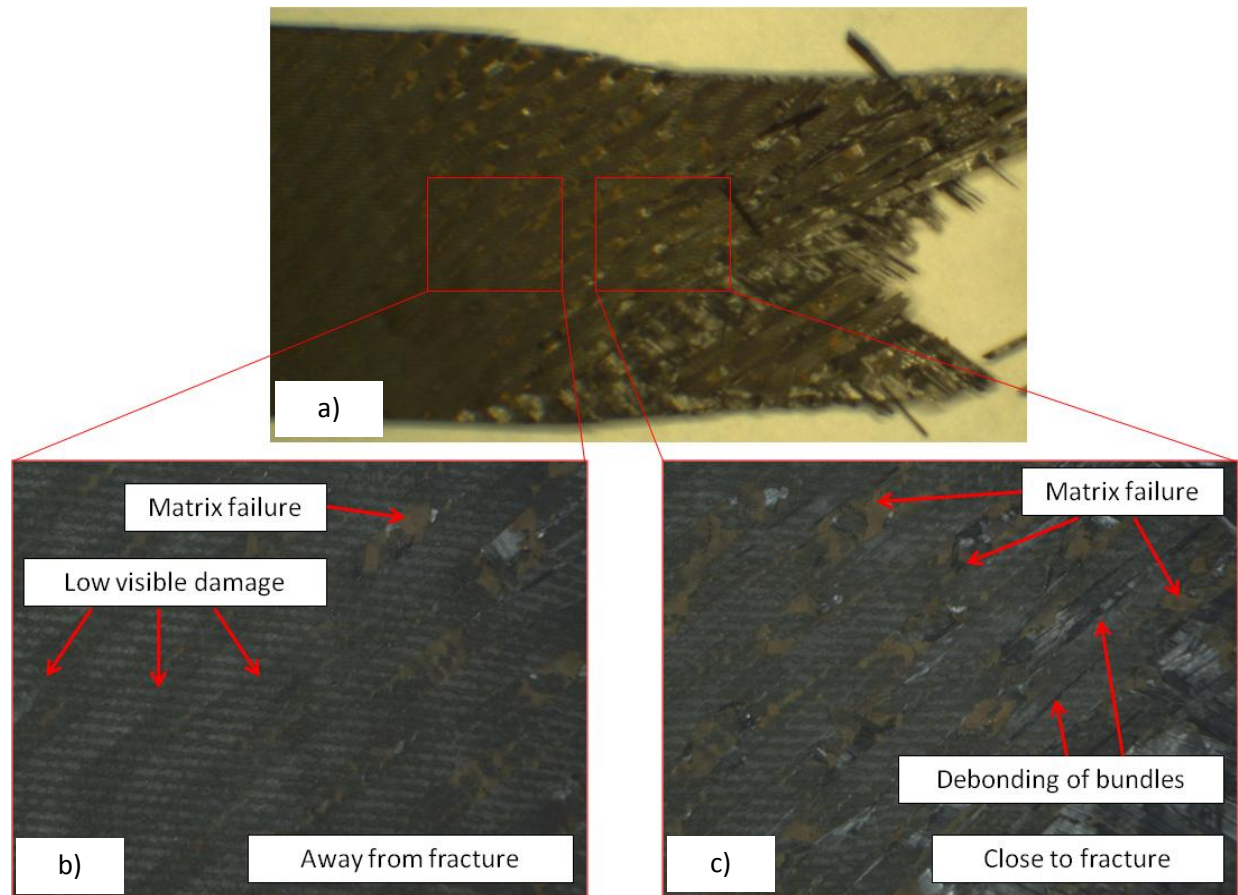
Images illustrating a) the fracture surface, and magnified regions captured b) away from the fracture surface and c) close to it. These images show the specimen fatigued at RT.
